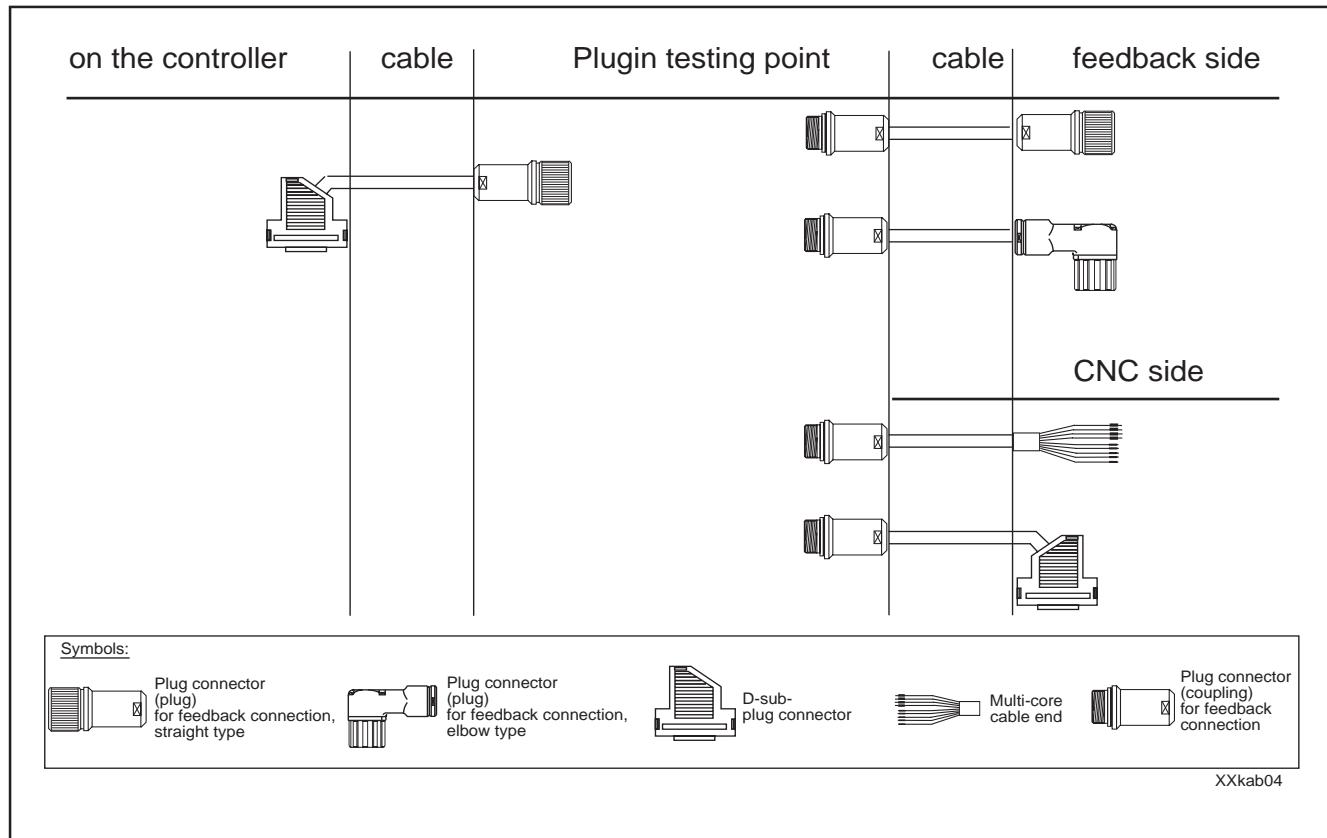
Assembled cable with plugin testing points (also see Figure 3.24)
